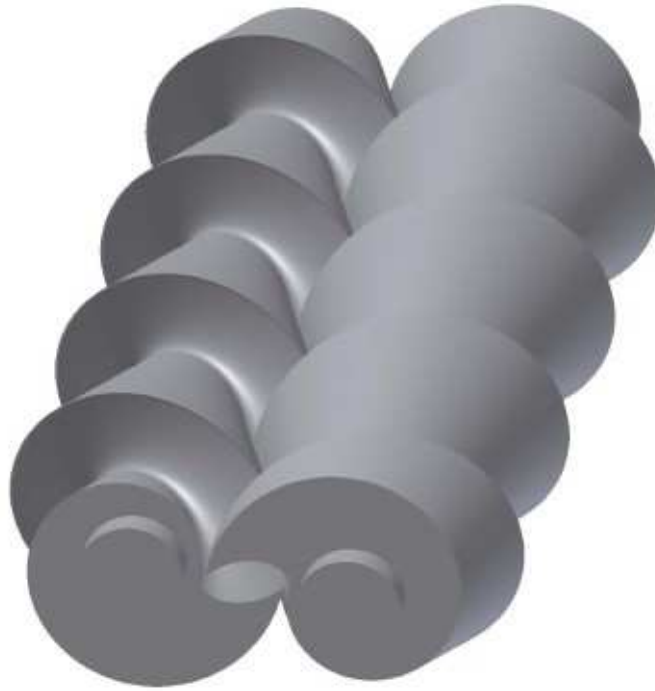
3-D sketch of a screw pump rotor with involute profile
